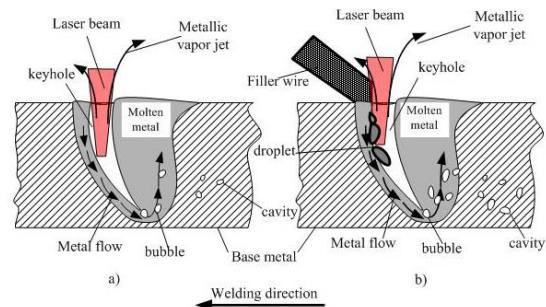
Cavity formation in laser welding on the board without (a) and with (b) filler wire.
